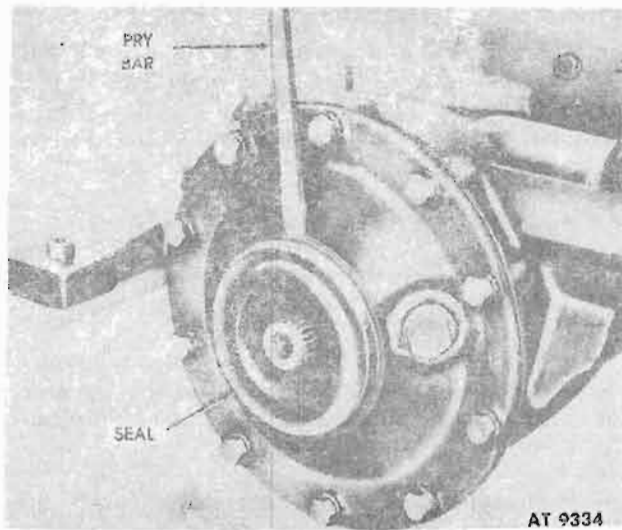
Removing Differential Case Side Gear Bearing Seal.
